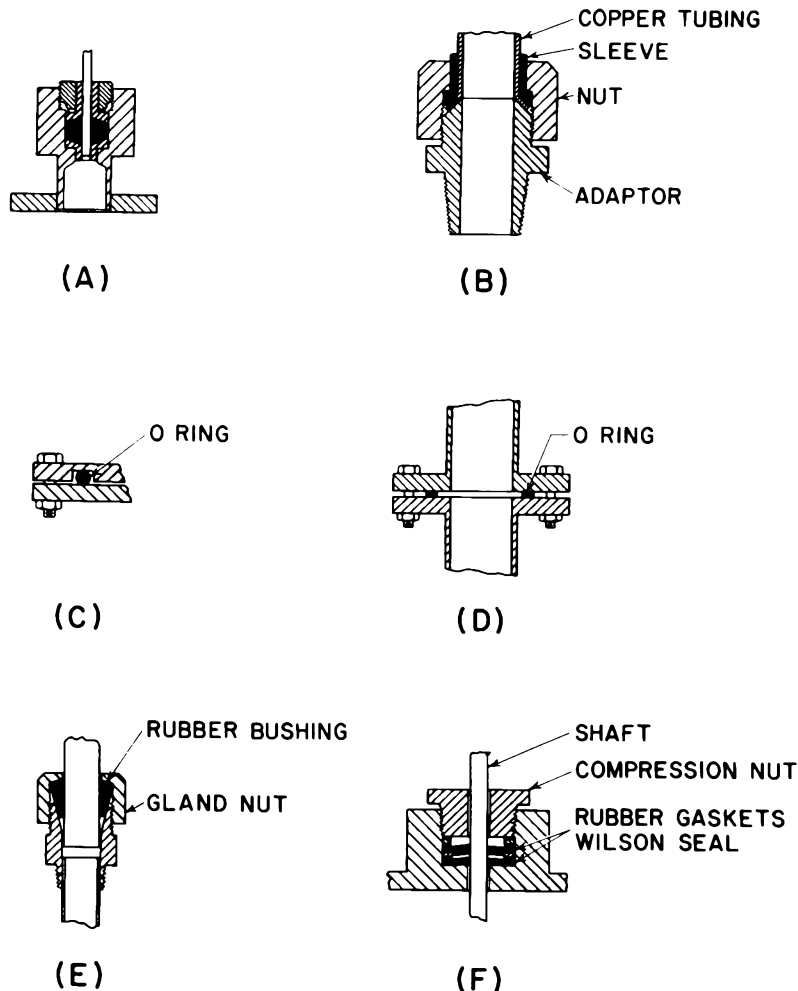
Types of Vacuum Seals: (A) compression head; (B) flare fitting; (C) rubber O ring; (D) copper O ring; (E) gland type; (F) Wilson seal
